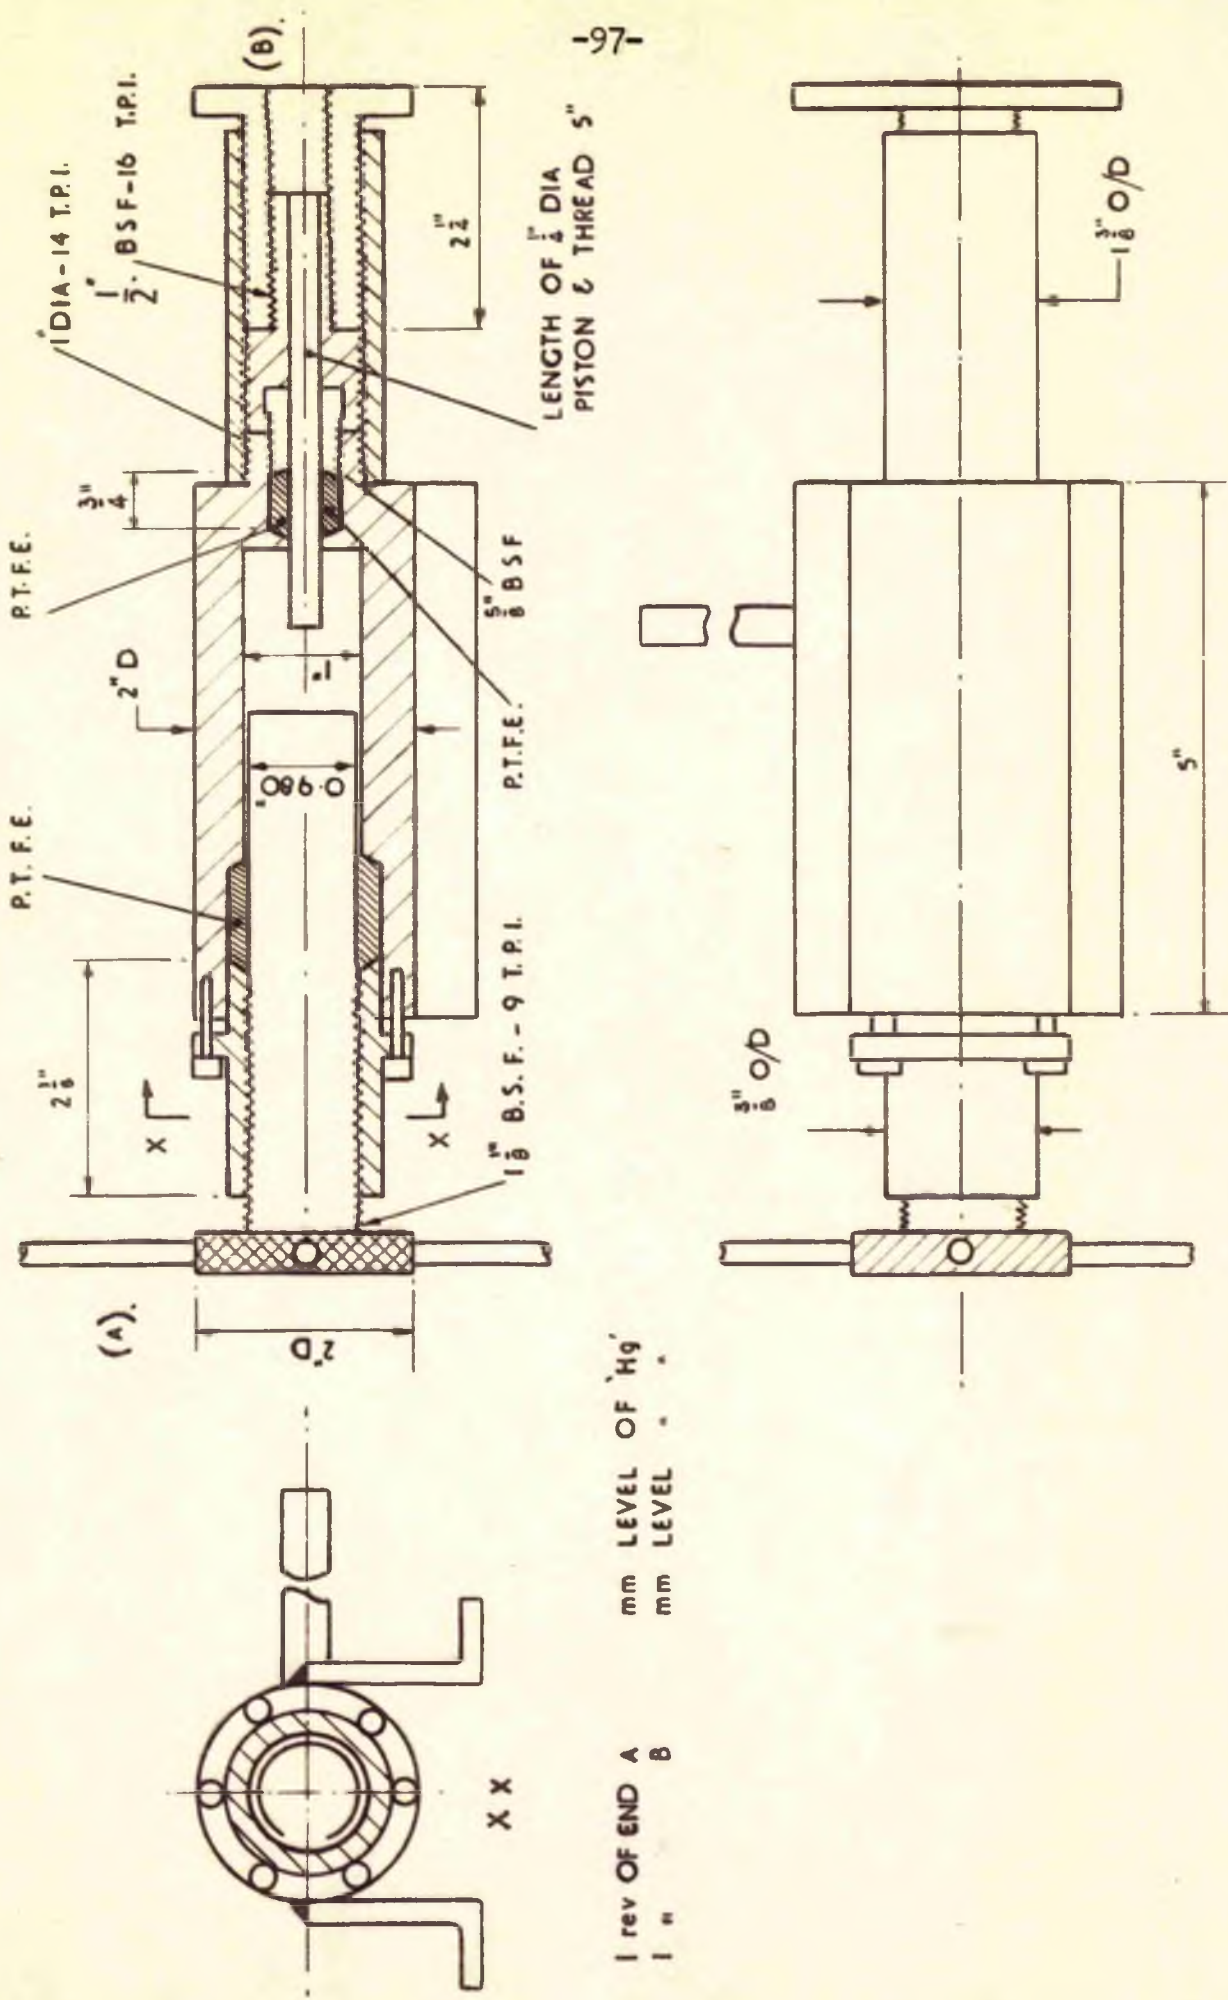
MAKE UP PISTON AND CYLINDER ASSEMBLY
